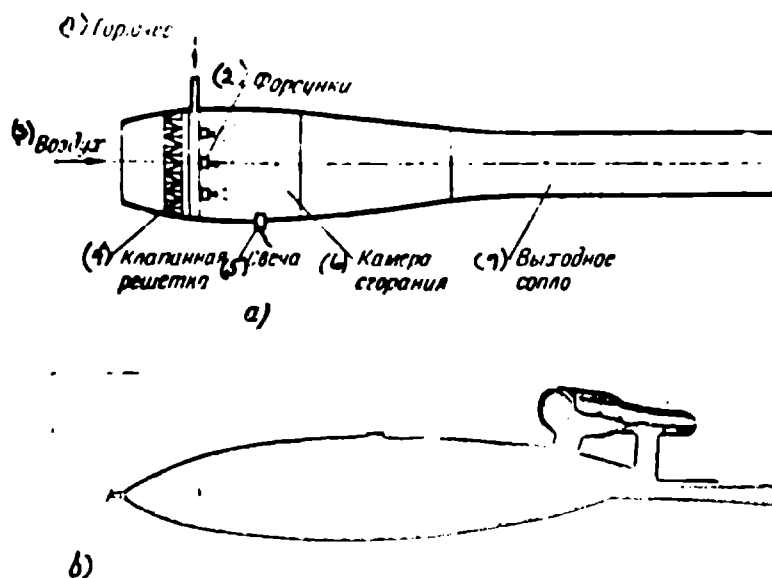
A pulse-jet engine (PVRD). a -- schematic, b -- installed on a missile. Legend: 1) fuel; 2) injectors; 3) air; 4) flap valve assembly; 5) igniter; 6) combustion chamber; 7) exhaust nozzle.
